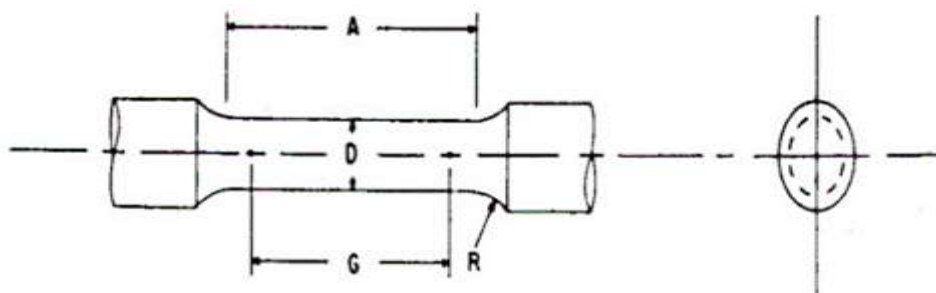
Weld joint specimen prepared for the tensile test
